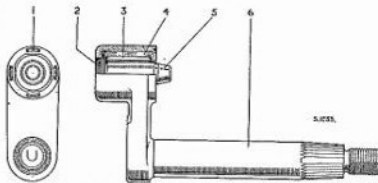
Rocker shaft roller assembly as fitted to D.H.Q. steering gear
